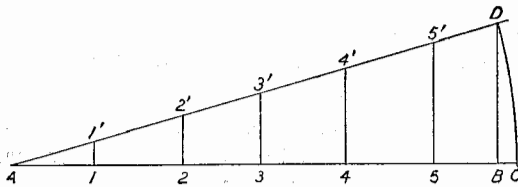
Finding Position for Punching Holes, While Sheet Is in the Flat
